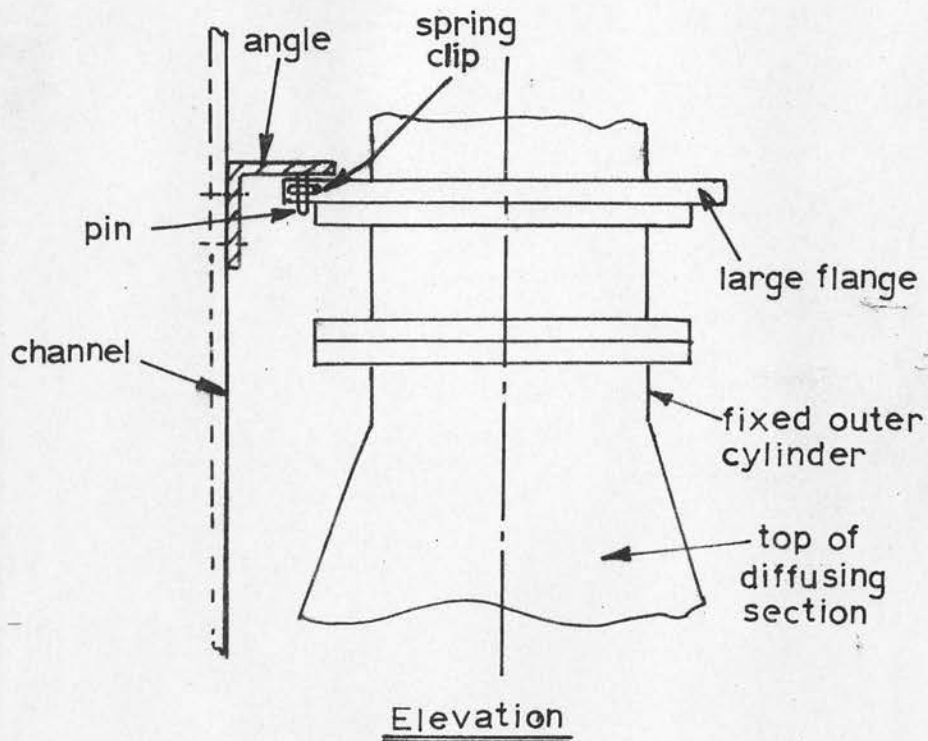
Lower fixture. Large flange on outer cylinder located and fixed to channel.
